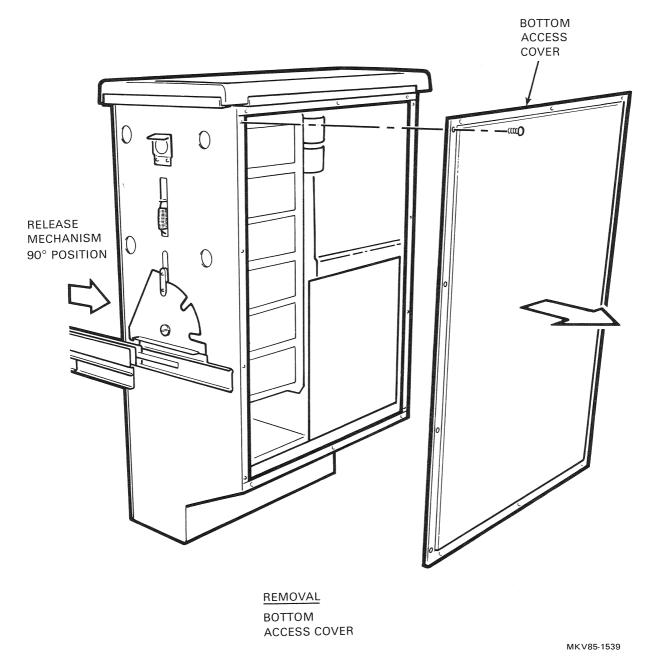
Accessing the BA32 CPU Mounting Box Hardware Components (Sheet 2 of 2)
